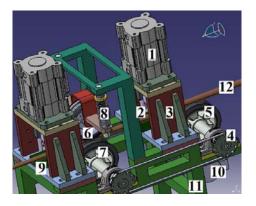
Measuring and Cutting Component Schematics: 1 - air cylinder for blade powering; 2 blade and it's support and guiding; 3 - cutting skeleton; 4 – rotary wheels for belt movement; 5,6,7 – rod guiding wheels (fixed and mobile); 8 – fixing spring; 9 - opposite blade ensemble; 10,11 – frame components; 12 – processed rod
